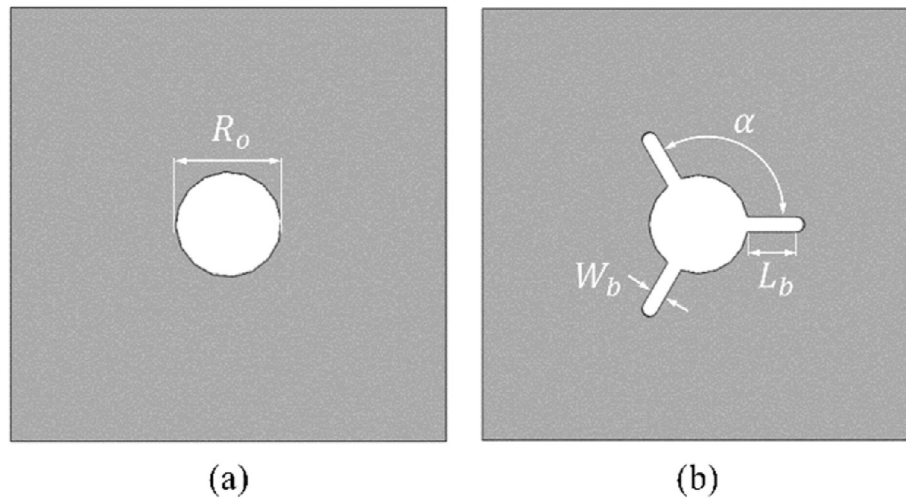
Outer sheet hole radius, R_o , and 3-branch joints outer sheet hole parameters: branch width, W_b , and branch length, L_b .
